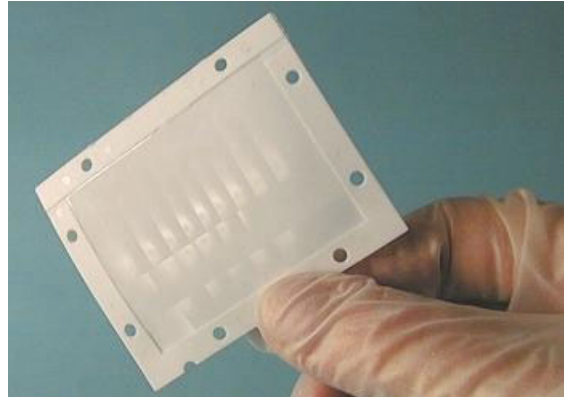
Injection moulded lenslet arrays in polyethylene.
